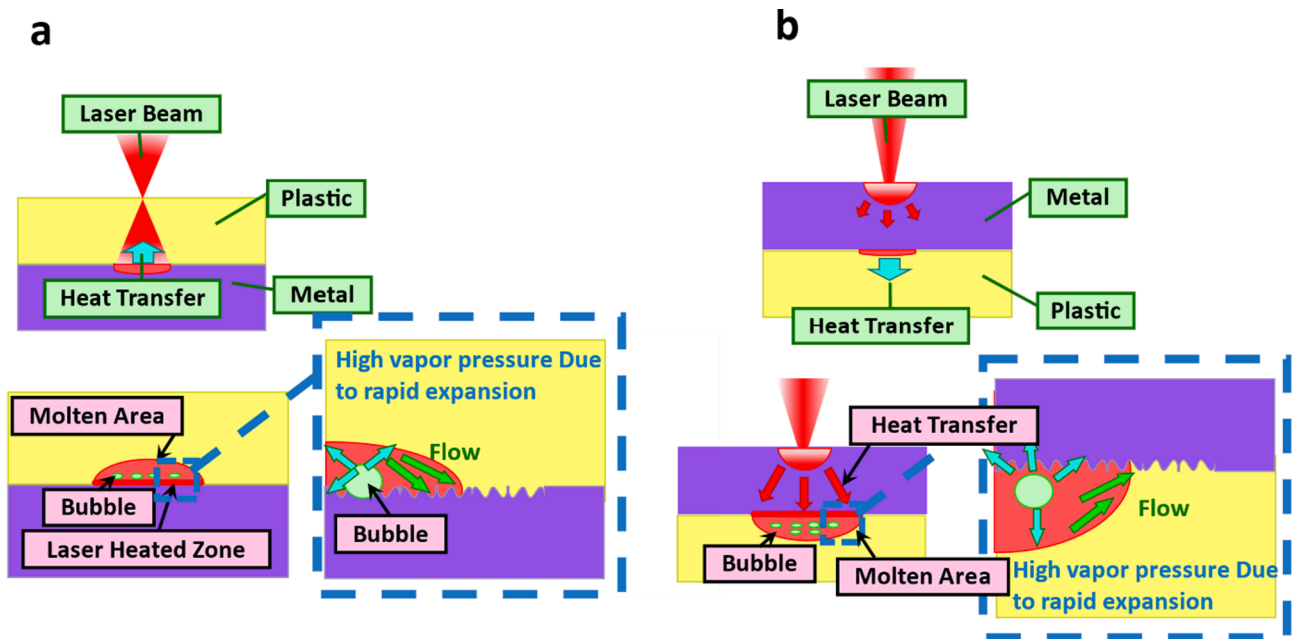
a) laser welding of a transparent polymer to a metal. b) laser welding of a coloured polymer to a metal. In this state, only the surface of the metal is heated, and the heat is conducted to the polymer underneath.
